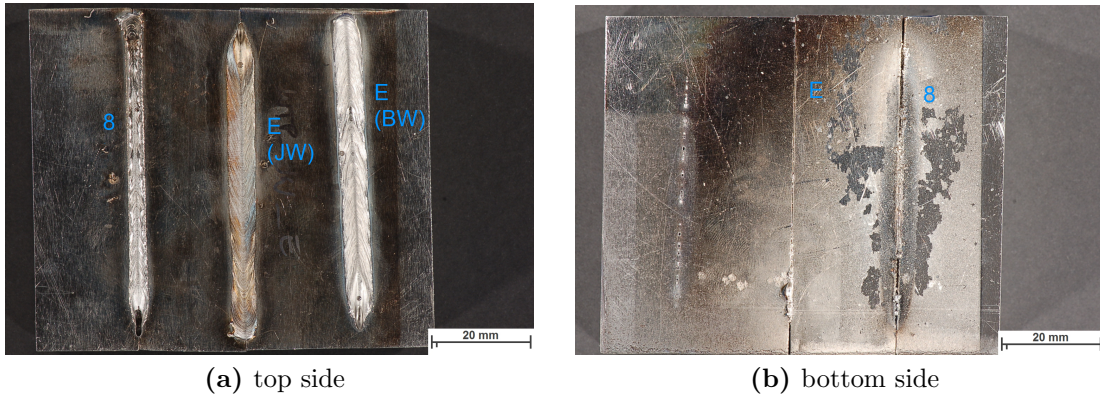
Weld test plate with two joint welds and one blind weld for check-up
